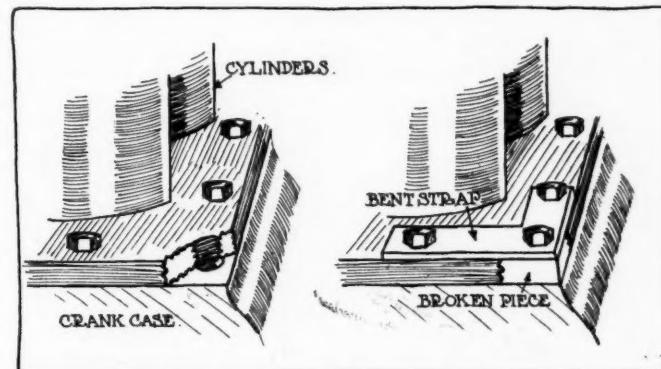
Cylinder flange repair, showing how a strip of iron can be used to take the place of a piece broken out of the casting
